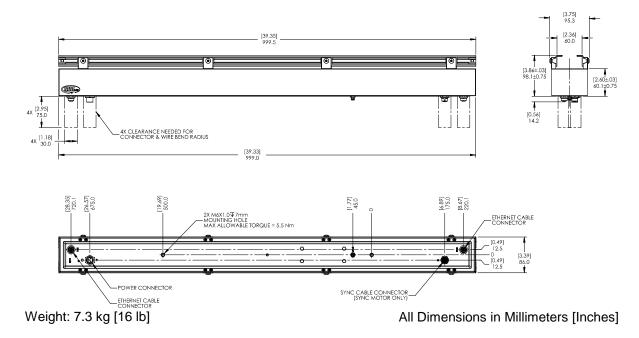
1000 mm MM LITE Ethernet Motor Mechanical Drawing
